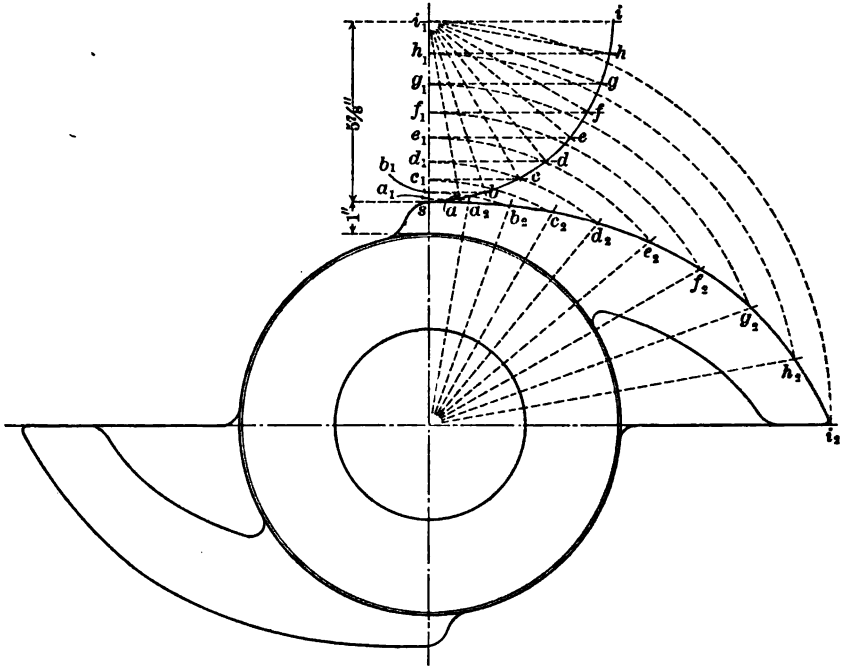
IMPROVED FORM OF CAM FOR STAMP MILLS.
